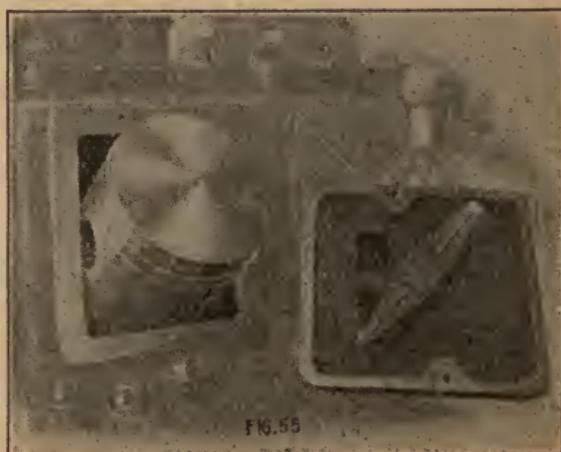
Removing piston and rod assembly through inspection opening on Best engine.
